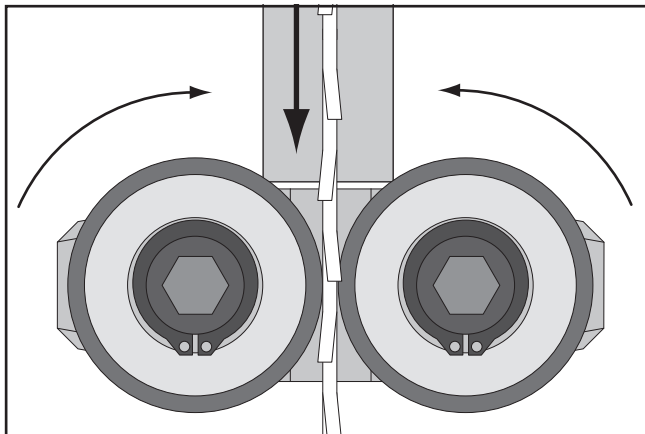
Blade guide bearings evenly and lightly touching the sides of the blade.
